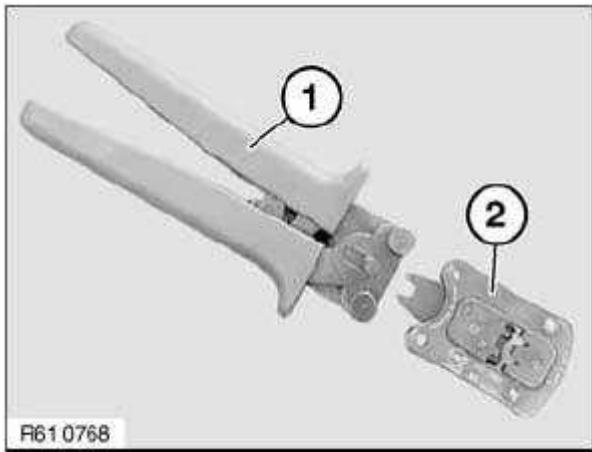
Identifying Crimping Head And Crimping Set Plier
